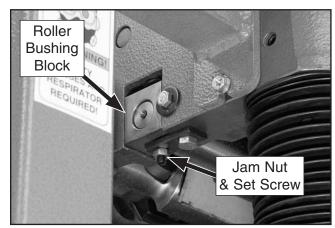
Location of infeed roller bushing block and height adjustment controls (left side shown).
